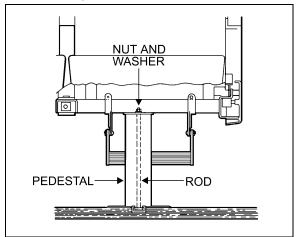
SEAT PEDESTAL ASSEMBLY
